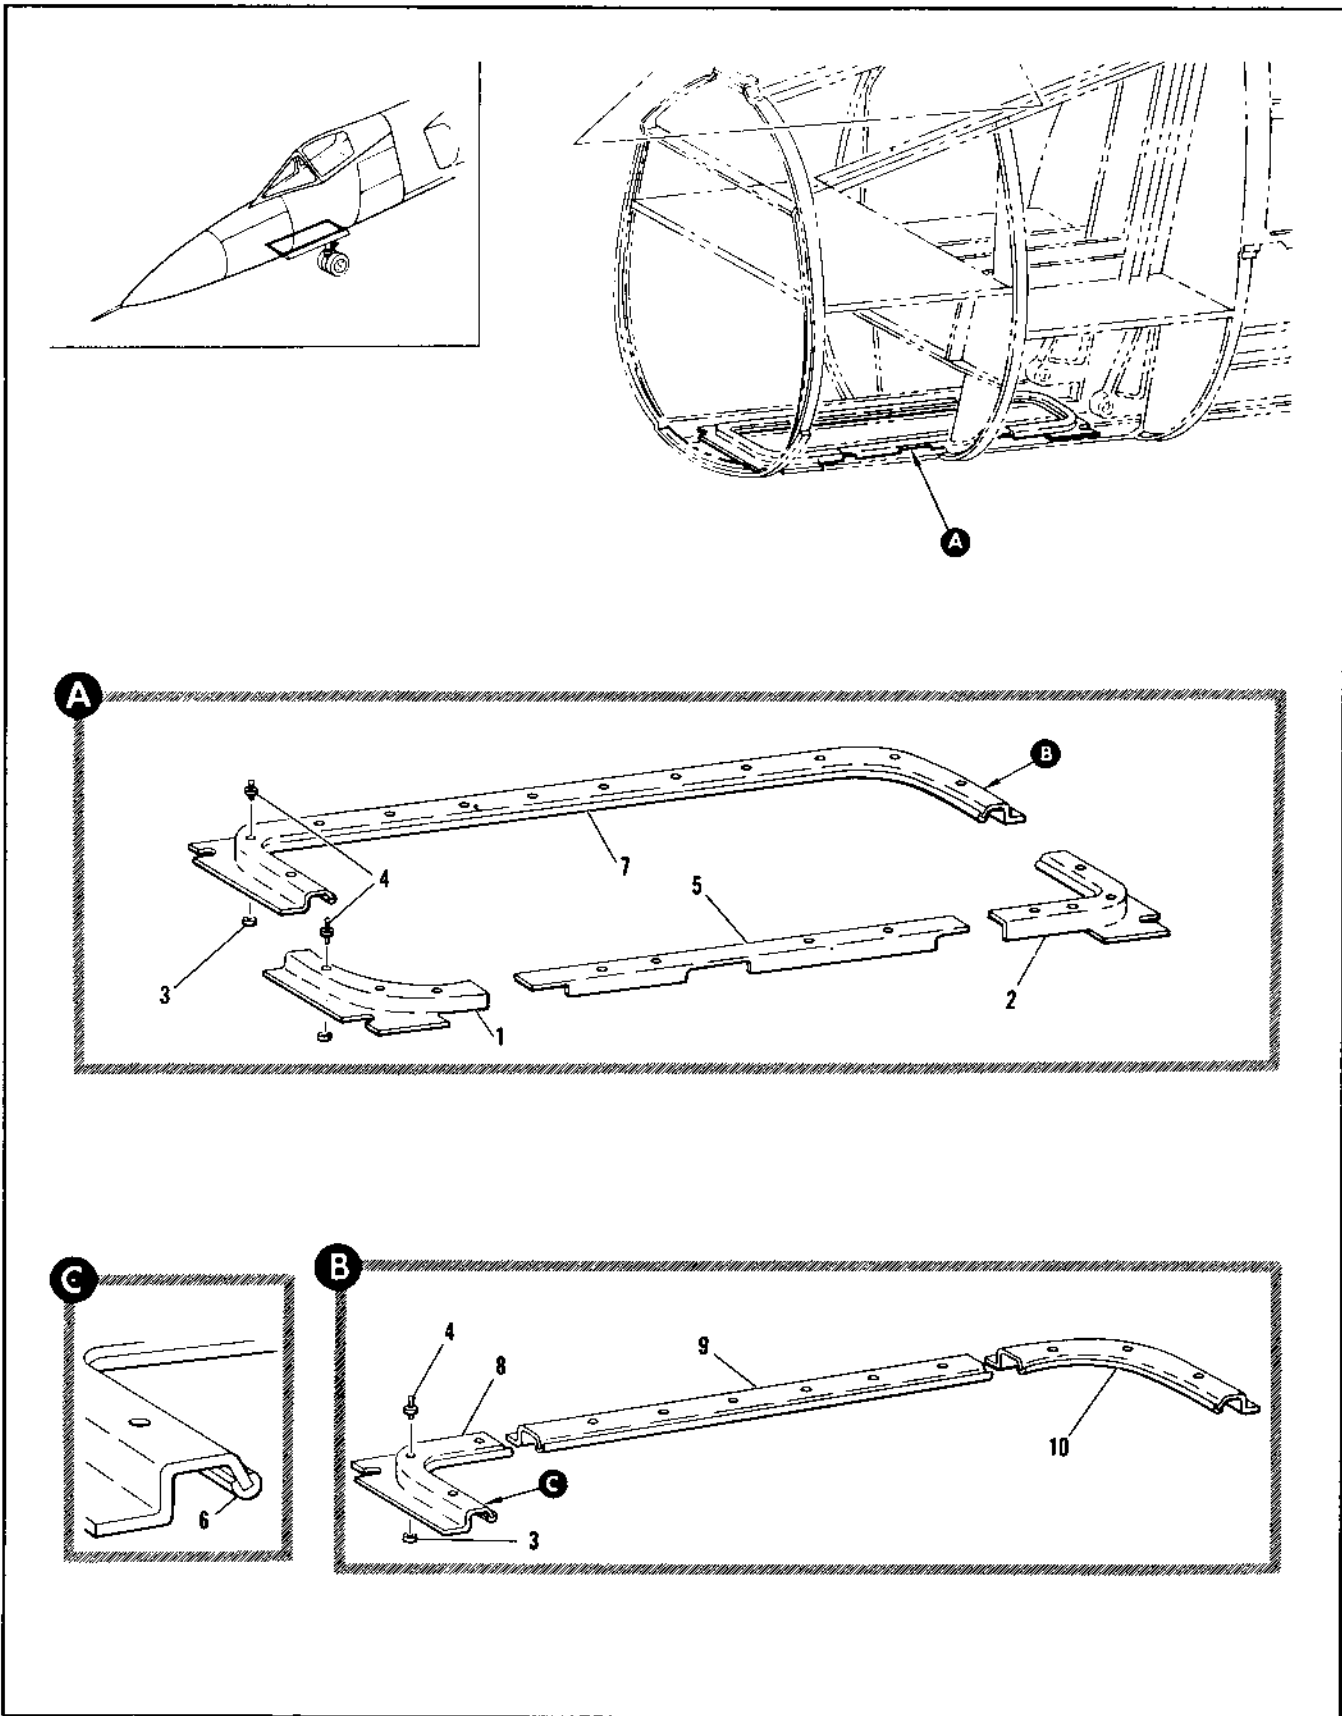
Nose Landing Gear Door Seal Frame
